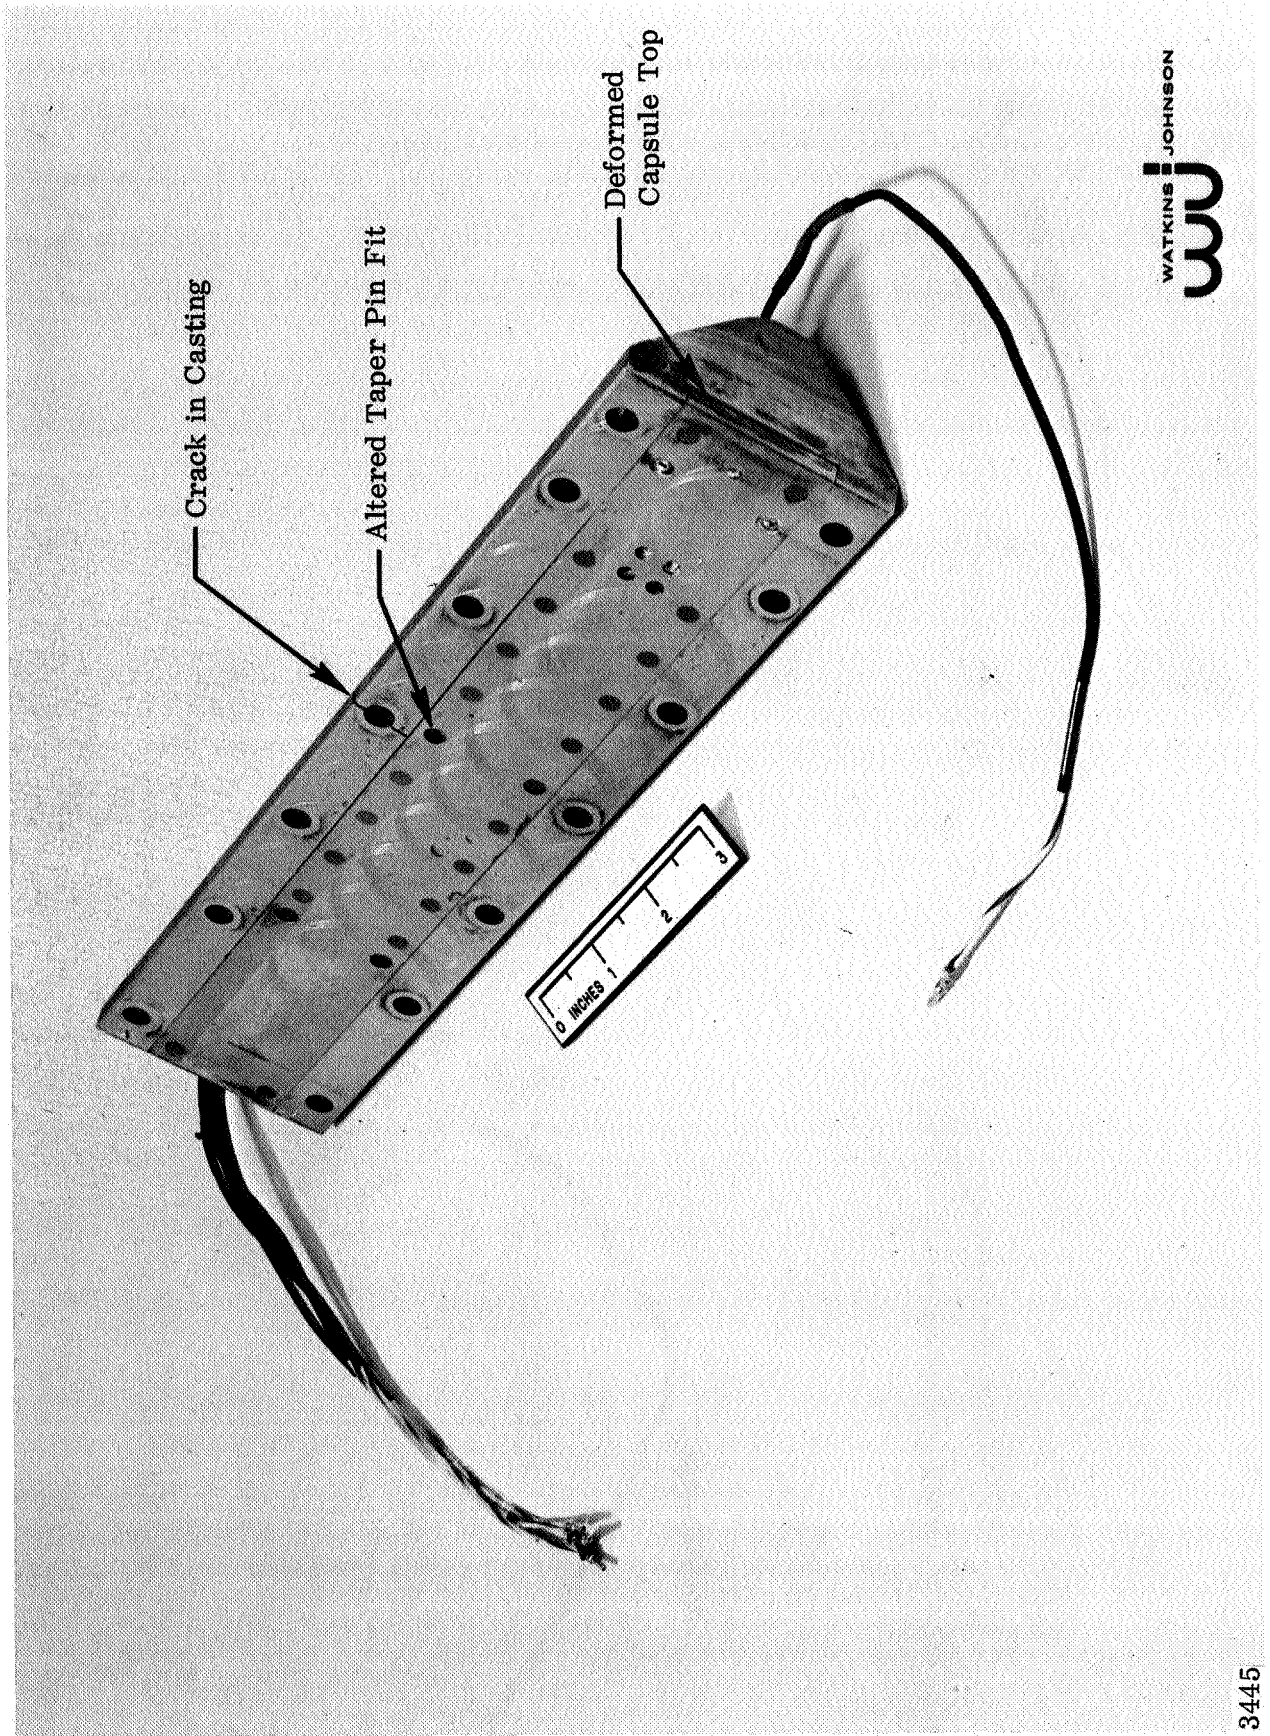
Bottom view of the WJ-398 S/N 3 after high shock test series showing damage to capsule.
